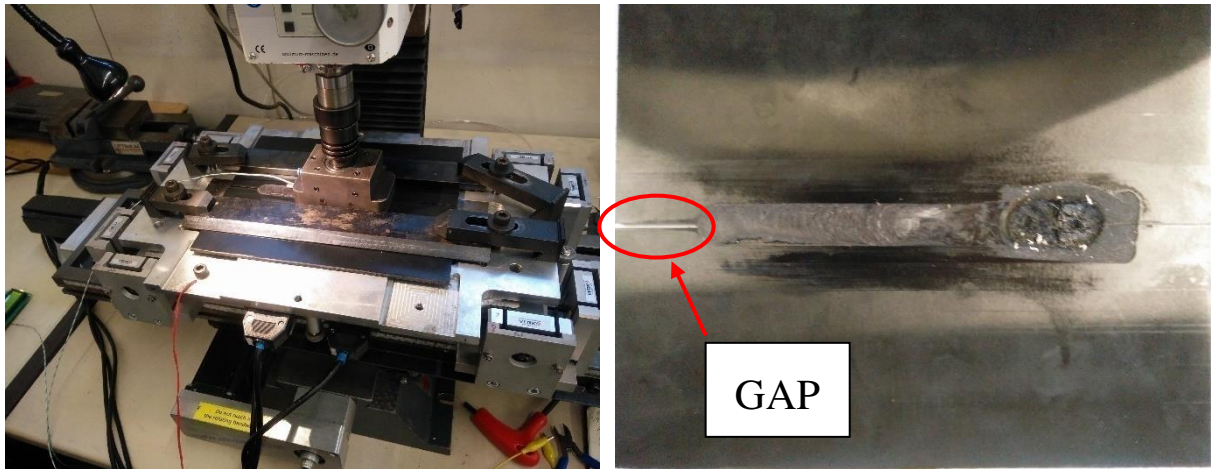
Welding with hybrid FSW tool (left) and resulting weld (right)
